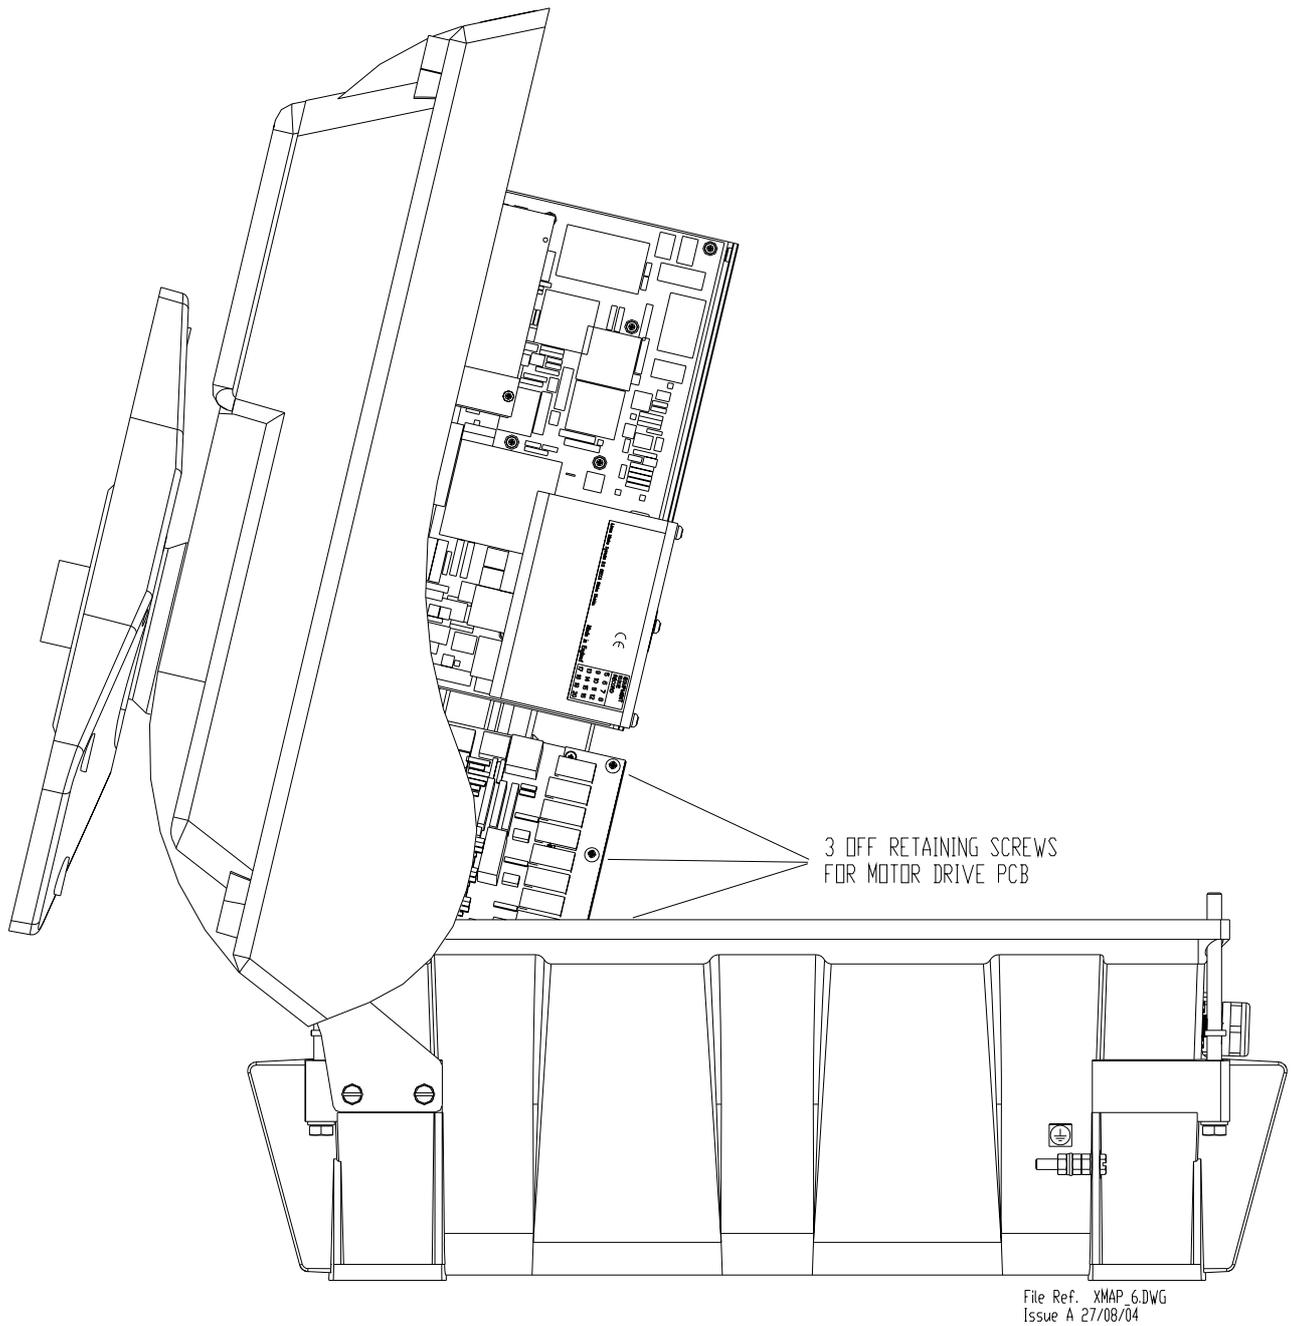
X-Band Masthead Turning Unit – Side view showing Motor Drive Board retaining screws
